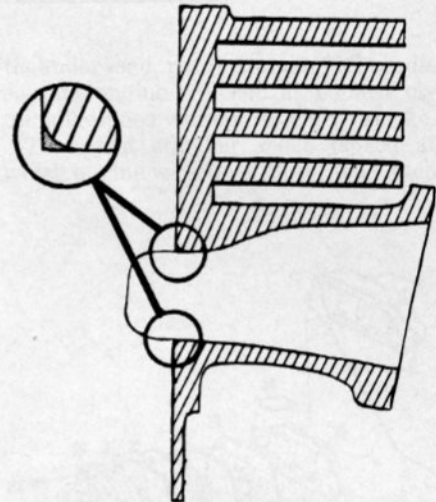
Some manufacturers recommend that edges of ports be chamfered as shown in insert, after boring.
